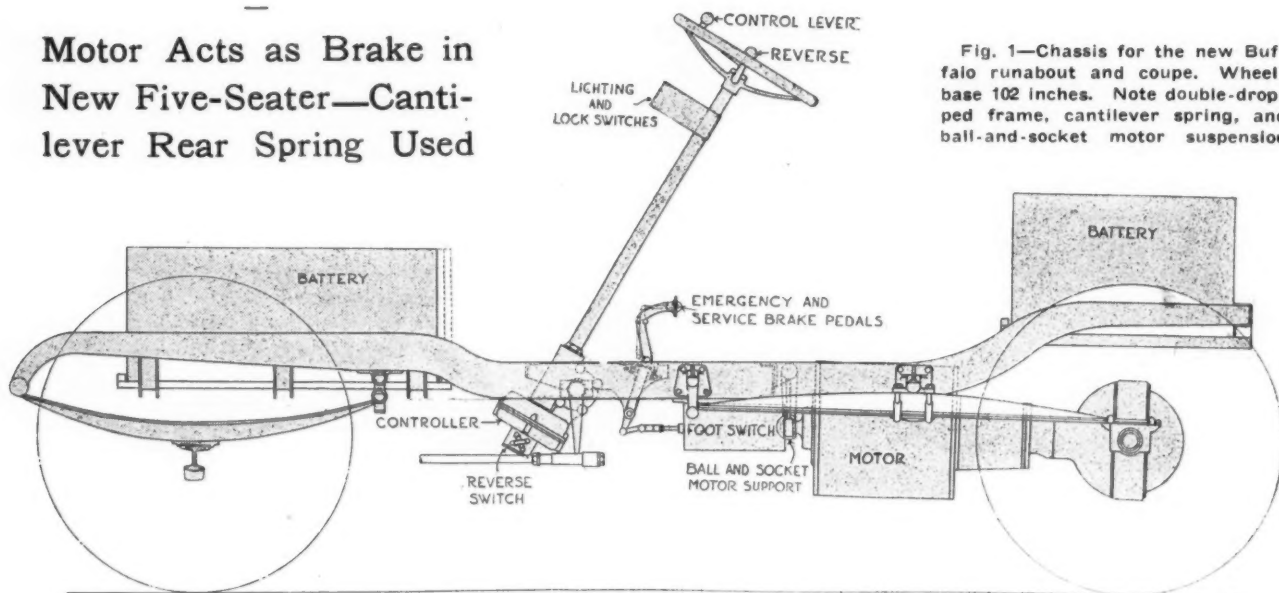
Chassis for the new Buffalo runabout and coupe. Wheel-base 102 inches. Note double-dropped frame, cantilever spring, and ball-and-socket motor suspension
